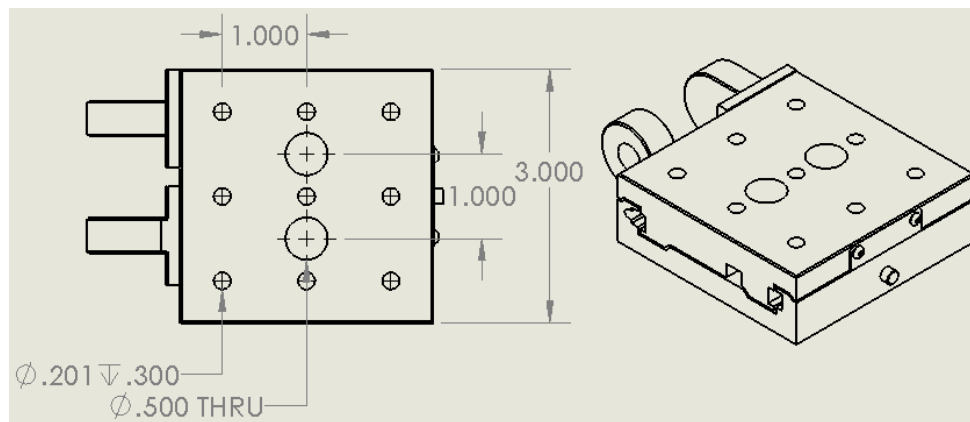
Linear stage which will sit beneath the cylindrical lens; all dimensions are in inches. (Schematic and drawing courtesy of [Newport Corp.](#))
